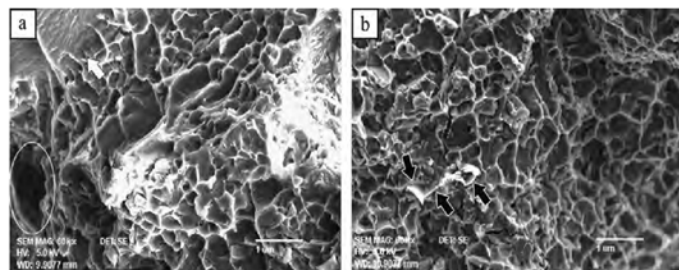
Fracture surfaces of (a) AR-SiC and (b) preform samples.
